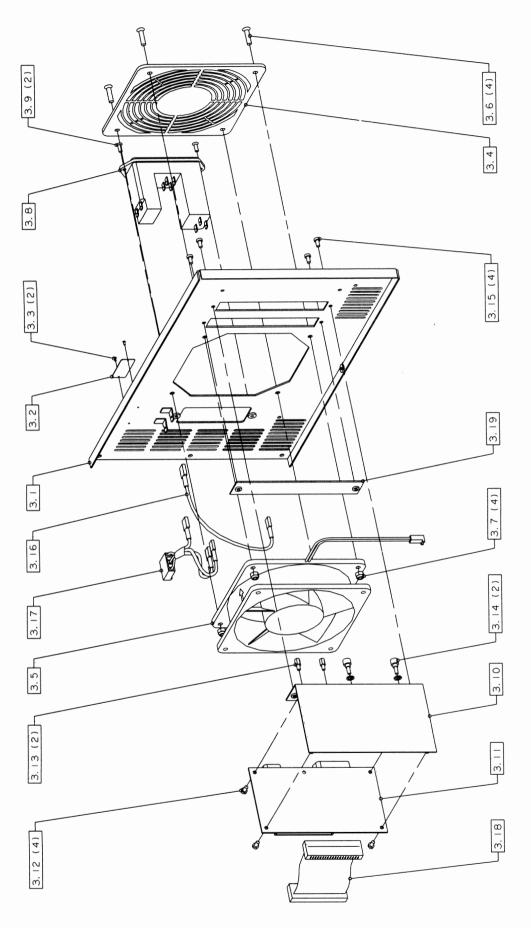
9320 REAR PANEL EXPLODED VIEW
